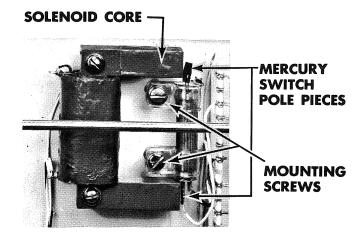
The mercury-switch pole pieces should be positioned within 1/32 to 1/16 inch of the solenoid core. Loosening the mounting screws permits adjustment.
